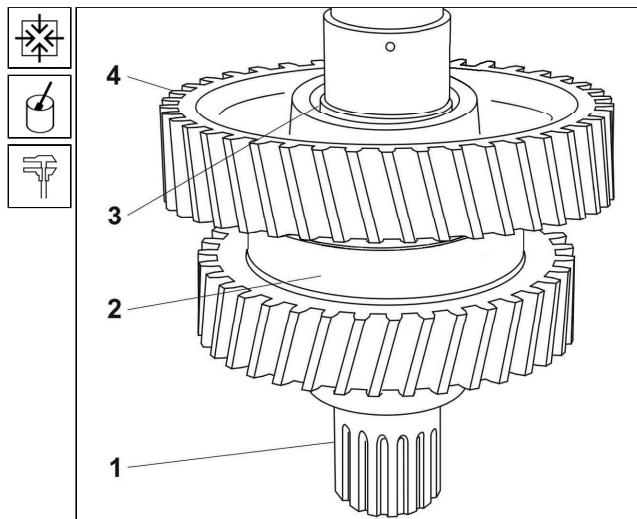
Reverse gear and 1st gear coupling sleeve
